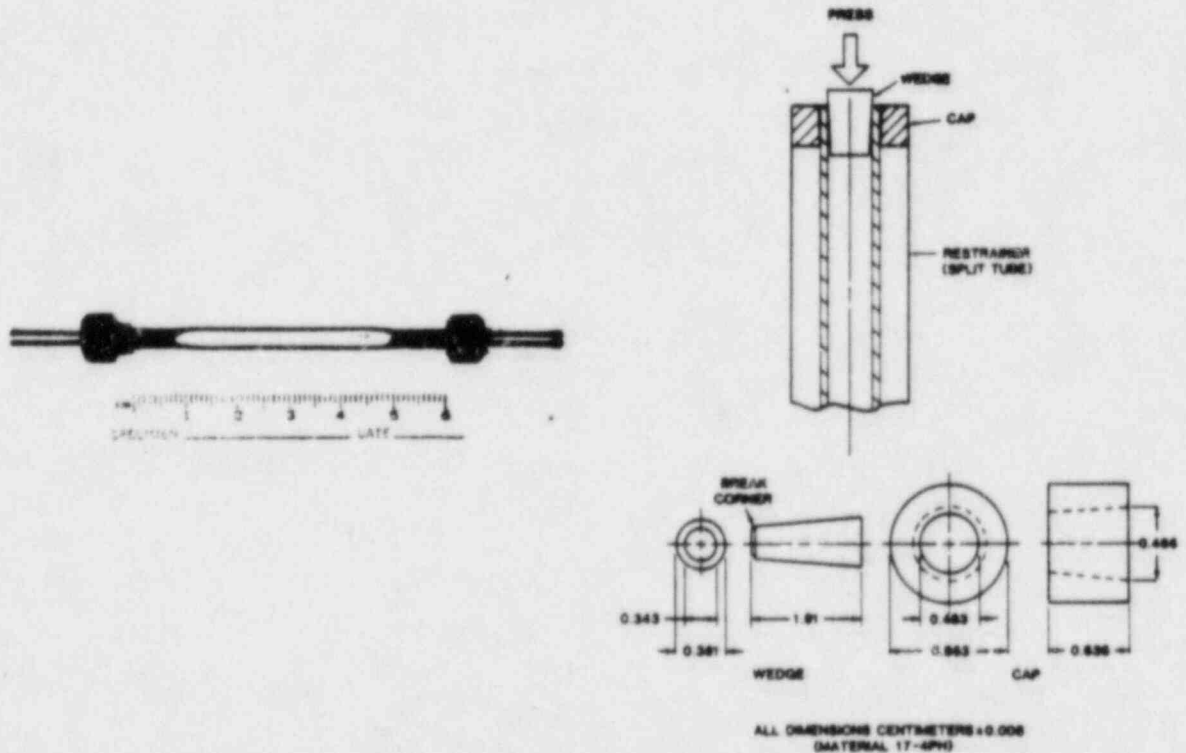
Button Head Uniaxial Tensile Sample Design for SCC Testing Small Diameter (<1.61 cm) Tubing.
